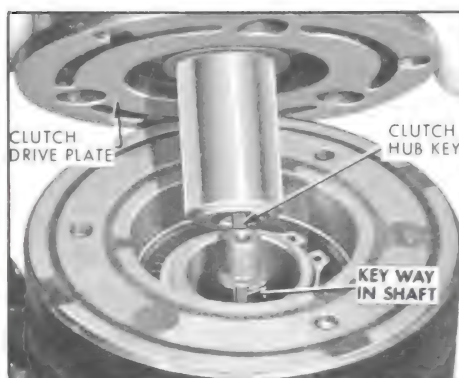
Positioning Clutch Drive Plate on Shaft
